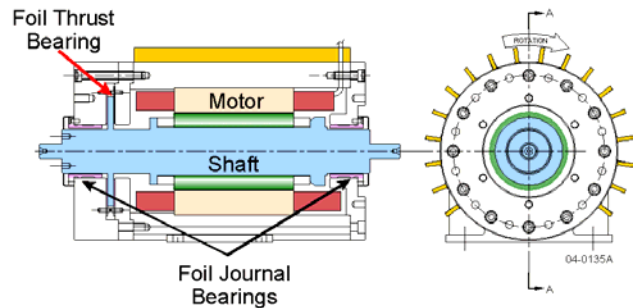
Cross section and end views of MiTi®'s 32 kW, 60,000 rpm Oil-Free, High-Speed Motor.
